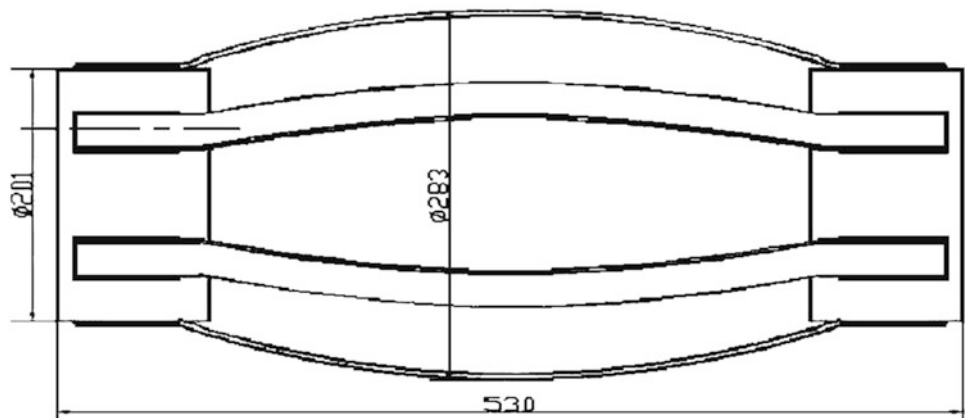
Inserted sleeve and inserting guide head for 193.7 mm moving casing
